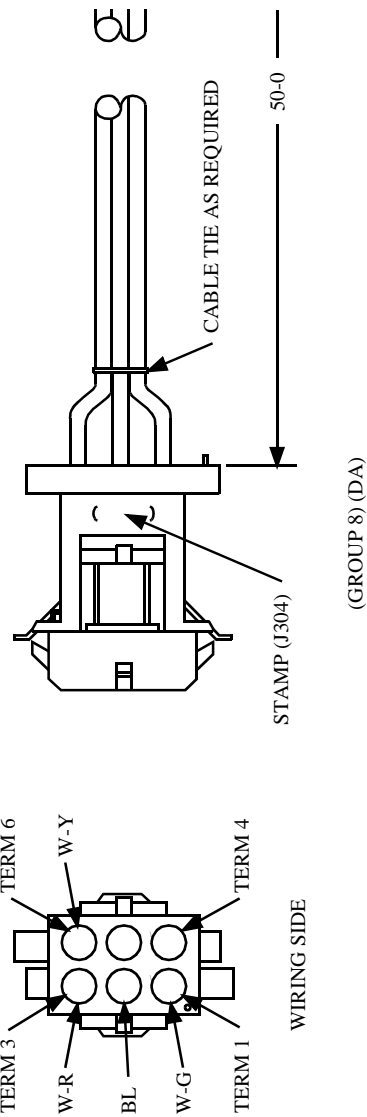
ED-7C723-35 Group 8 Cable Assembly
